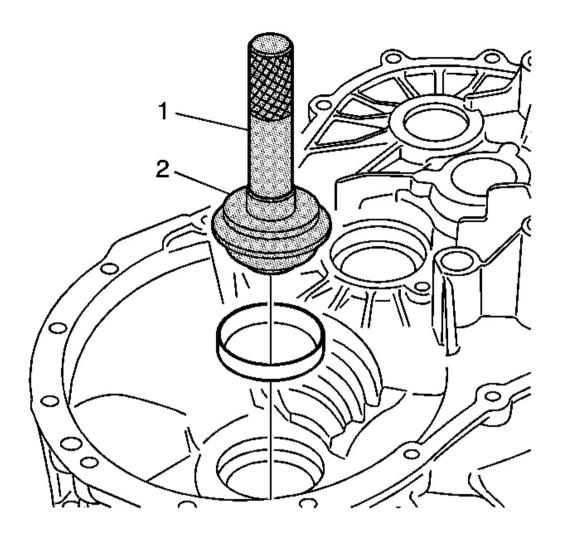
Installing Differential Bearing Race To Clutch Housing Courtesy of GENERAL MOTORS CORP.
